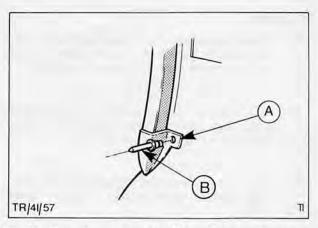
Flanged retainer and 'pop' rivet (lower end front door aperture weatherstrip)
